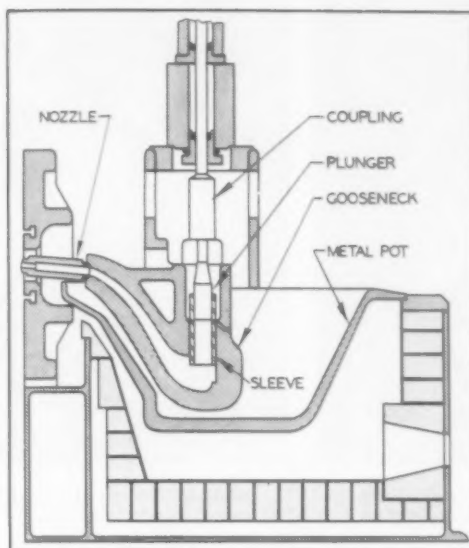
(right). Nomenclature and fundamental parts of the die casting machine.
